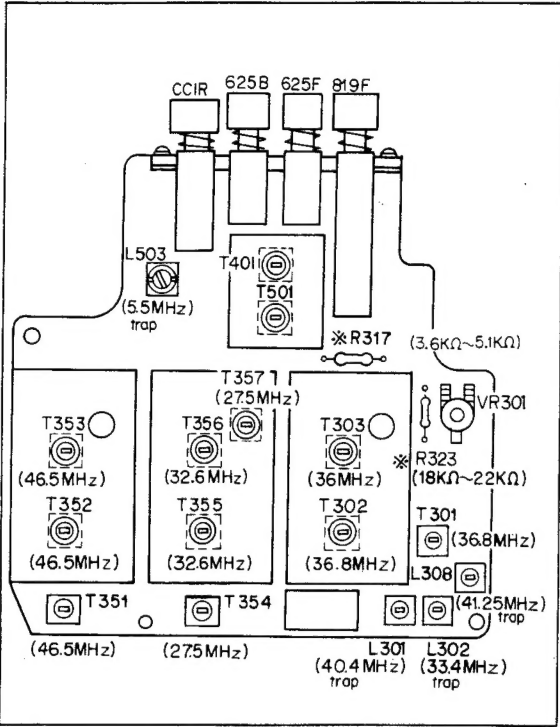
Adjusting parts location of VIF and SIF adjustment
